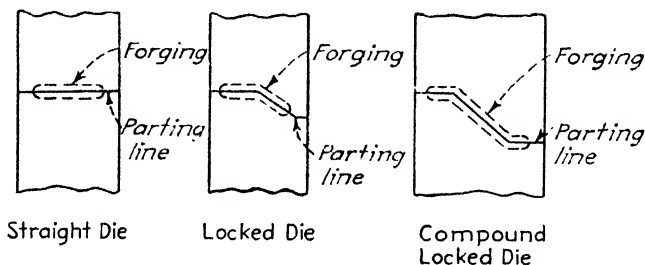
Types of forging dies: straight, locked, and compound locked.
